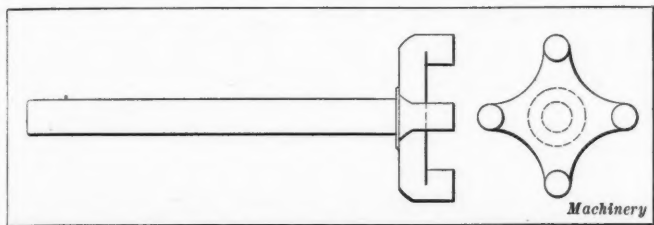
One of the Moving-picture Machine Cross-pins to be milled
